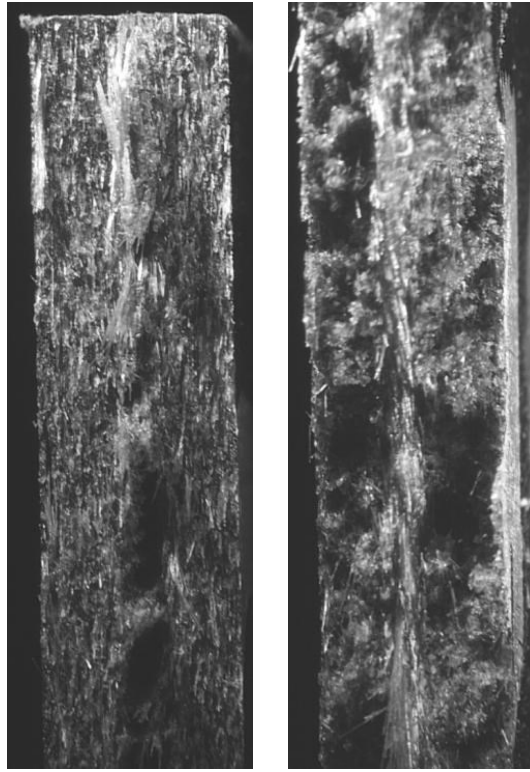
Fracture surfaces of glass/PA6,6 injection molded material tested in tension.
